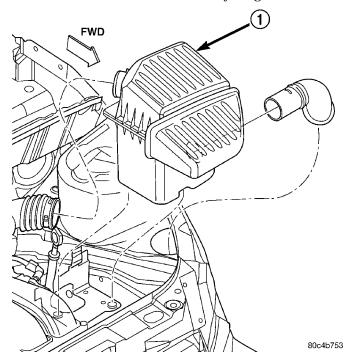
Air Cleaner Assembly Removal/Installation— Typical
